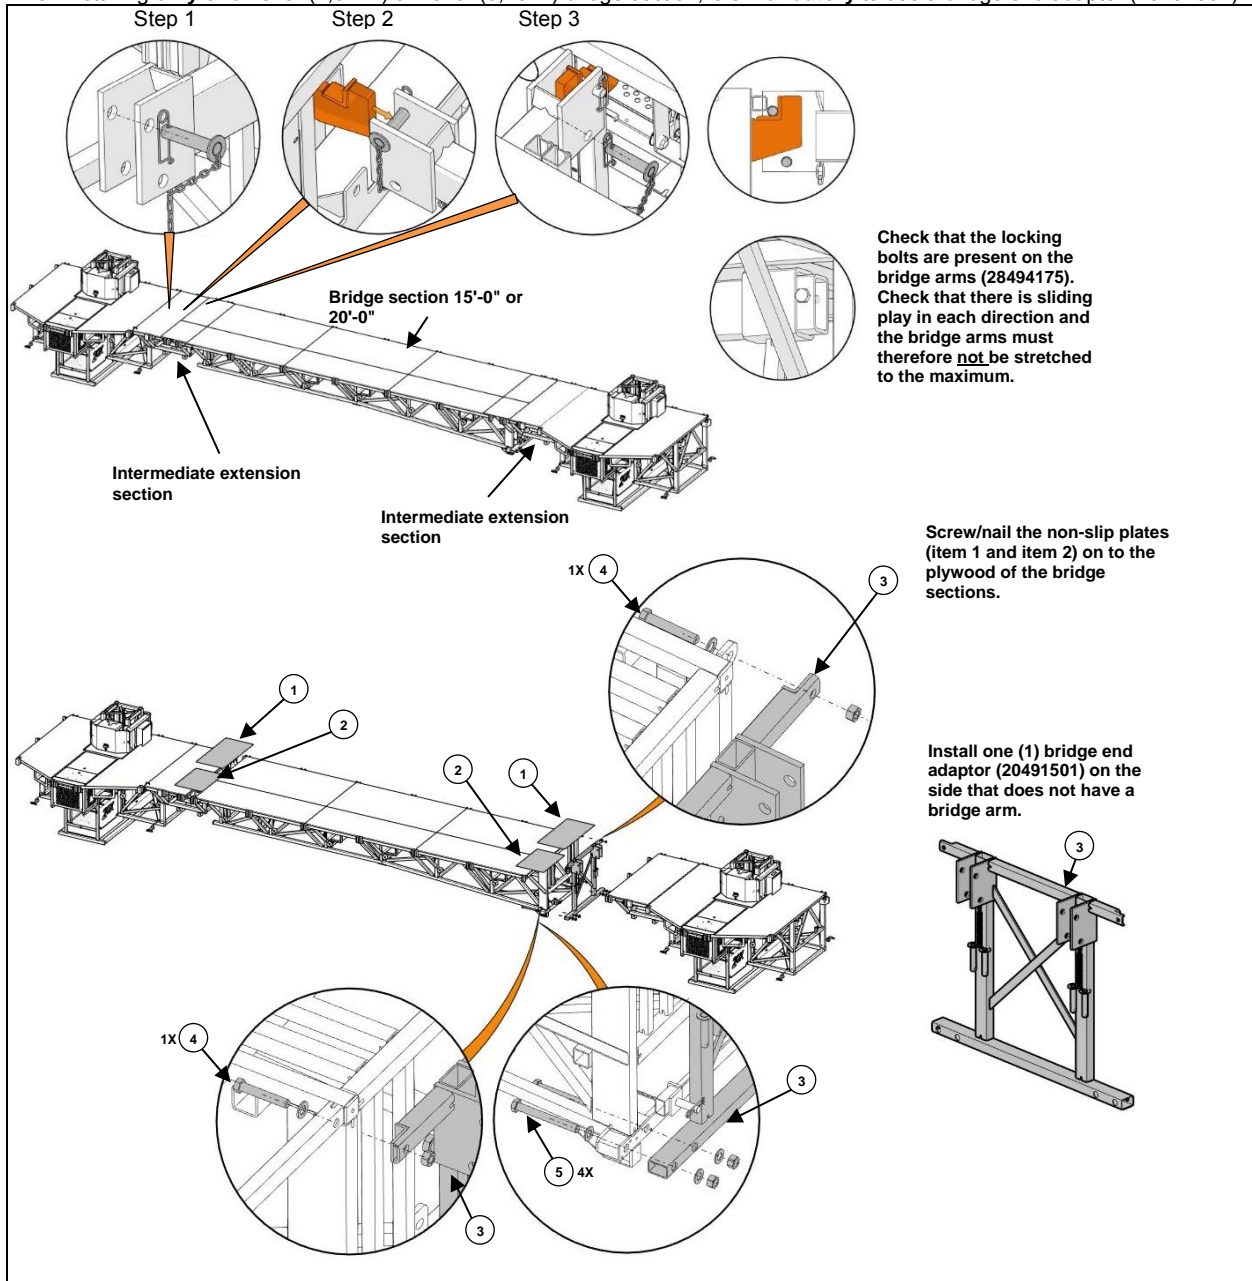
Installation of 15'-0" or 20'-0" bridge section between lifting units and/or intermediate extensions
